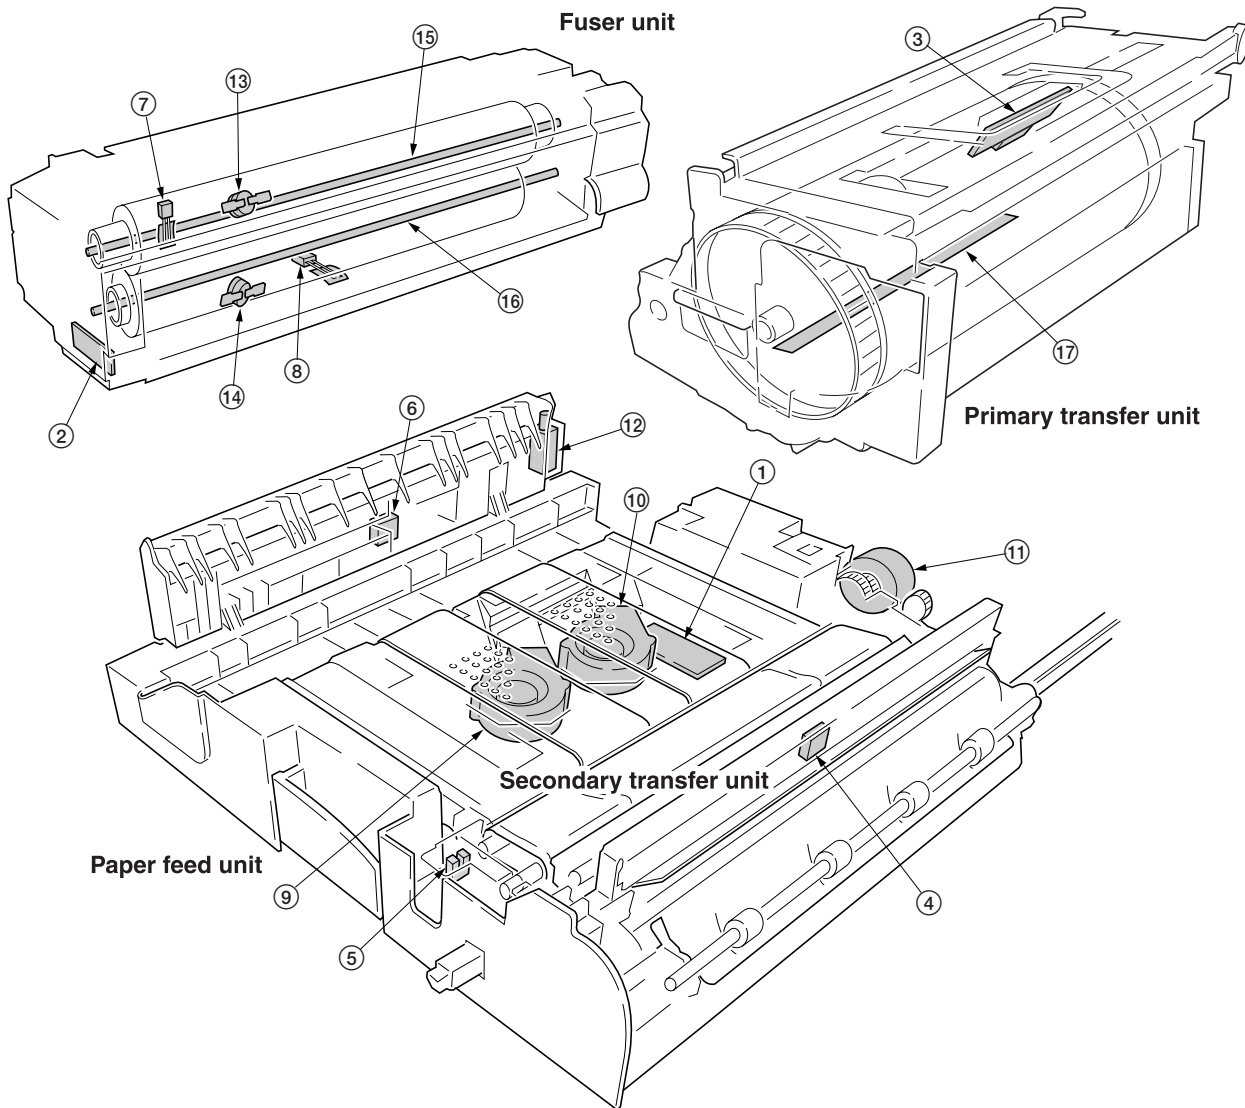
Primary transfer, secondary transfer, paper feed, and fuser units
